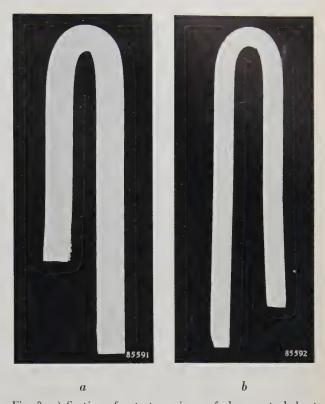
a) Section of a test specimen of chrome steel, bent through 180° by the machine shown in fig. 1 (tensile strength of specimen approx. 65 kg/mm²; specimen thickness d=1.9 mm; diameter of radius plate D=0.95 mm; thus D/d=0.5). b) Section of a test specimen of mild steel (tensile strength approx. 40 kg/mm²; d=1.0 mm; D=1.2 mm, and D/d=1.2).
